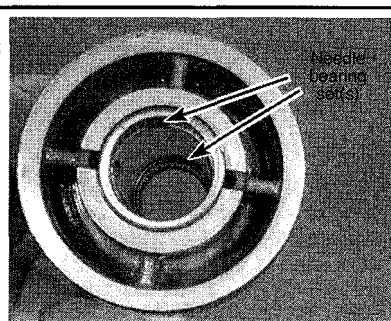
Check the propeller shaft needle bearings for wear or damage
